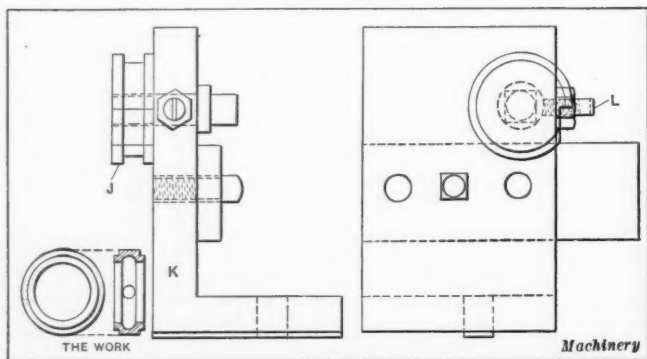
Work and External Forming Tool carried in Rear Toolpost
